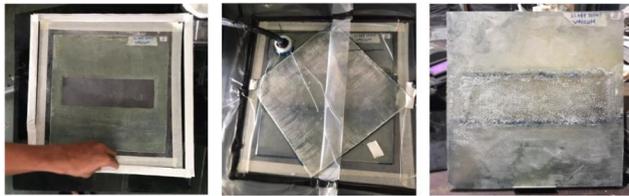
Scarf Method Vacuum Bagging Composite Repaired Panel
